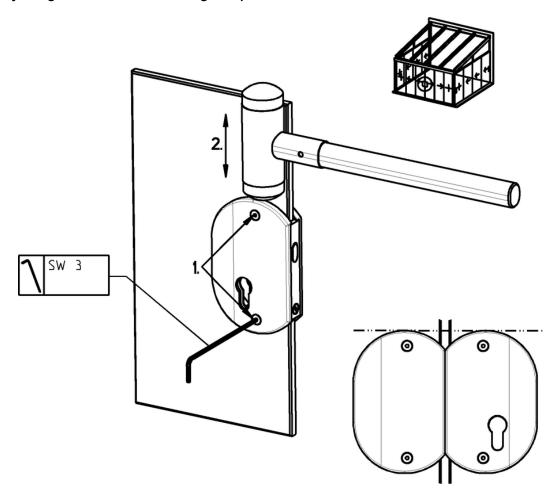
Adjusting the lockcase with hung bolt plus the latch bolt
